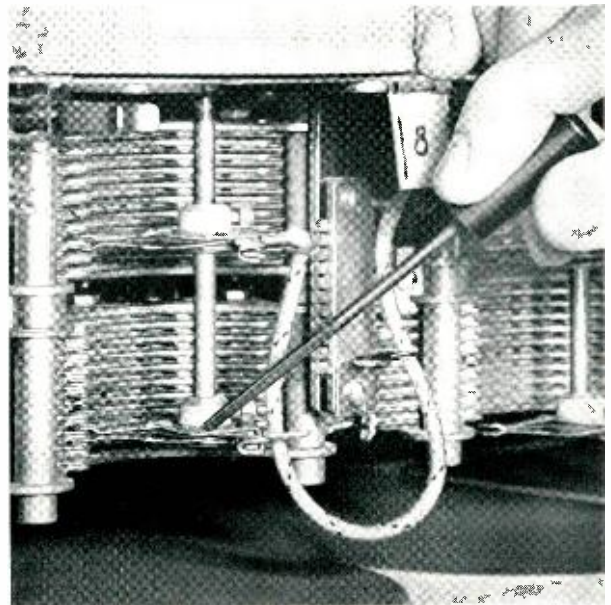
A replaceable spring is inserted into a wiper assembly.
